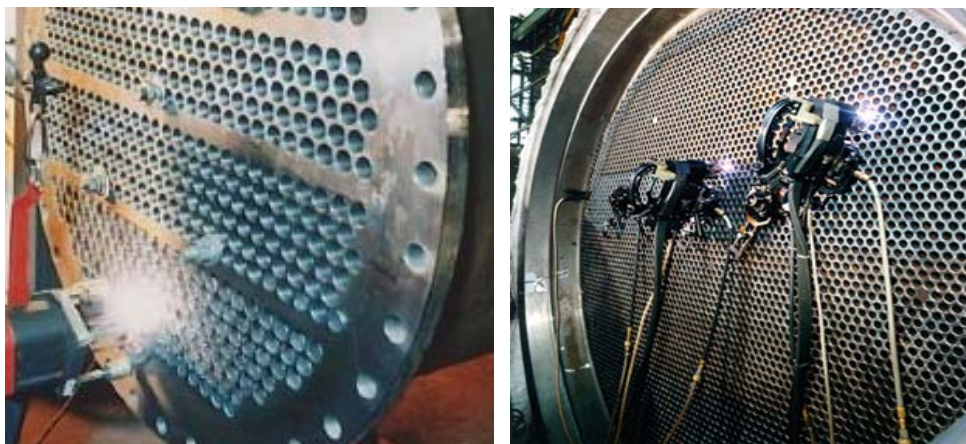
Examples of TIG Orbital welding in shell and tube heat exchanger manufacturing
